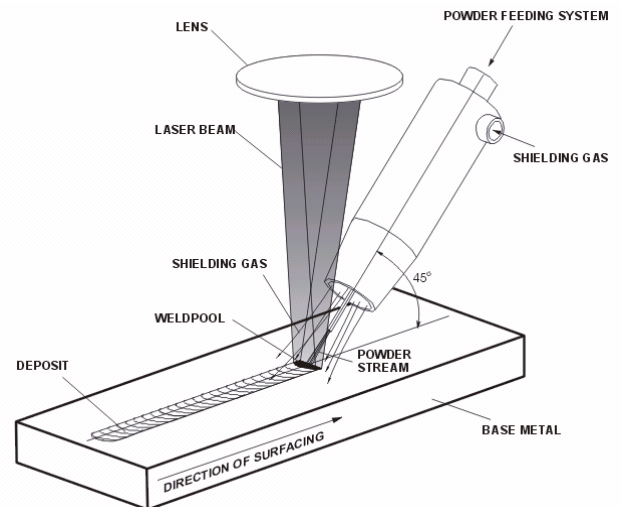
A scheme of laser powder surfacing process carried out along the short side of the rectangular diode laser beam spot with powder injection in front of the weld pool
